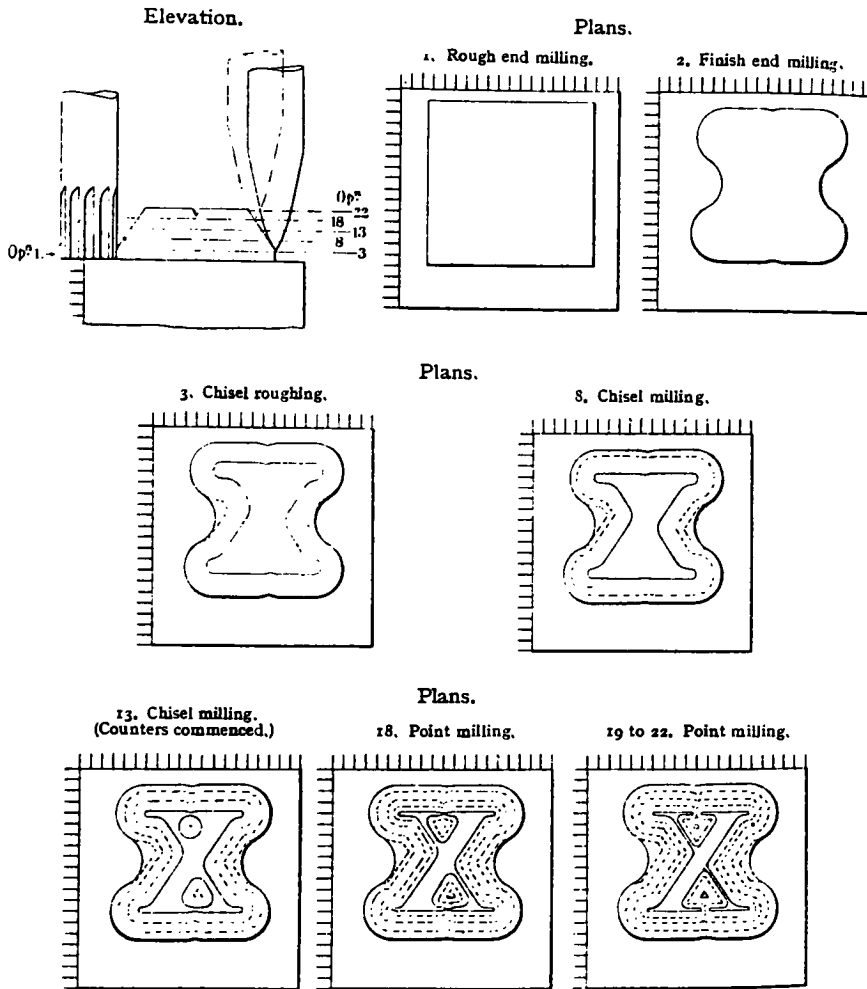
Operations of punch-cutting. (Typographical Printing Surfaces, page 200.)
